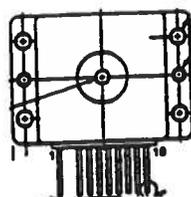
AVX-S3 input assembly (for OP-3 package)
